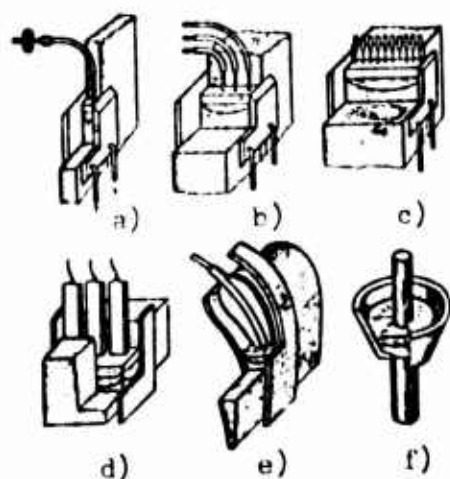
Basic methods of electroslog welding: a) without reciprocating motion of electrode wire; b) with reciprocating motion of electrode wire; c) multi-electrode; d) laminar electrodes; e) consumable neck; f) contact-slag.
